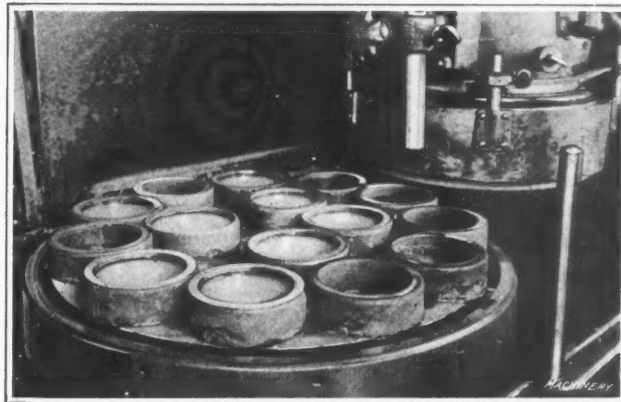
Method of holding and grinding Roller Bearing Race Rings on a Blanchard Vertical Surface Grinder
